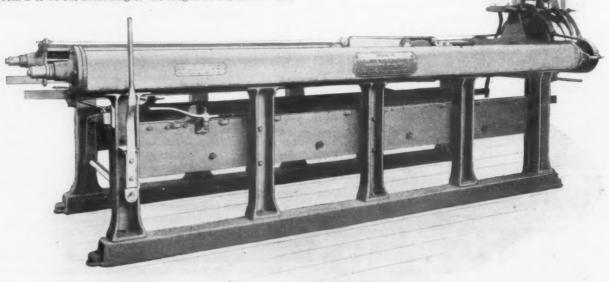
Side View of the No. 4 Automatic Multiple Punching Machine Built by the Excelsior Tool & Machine Company, East St. Louis. Mo.
